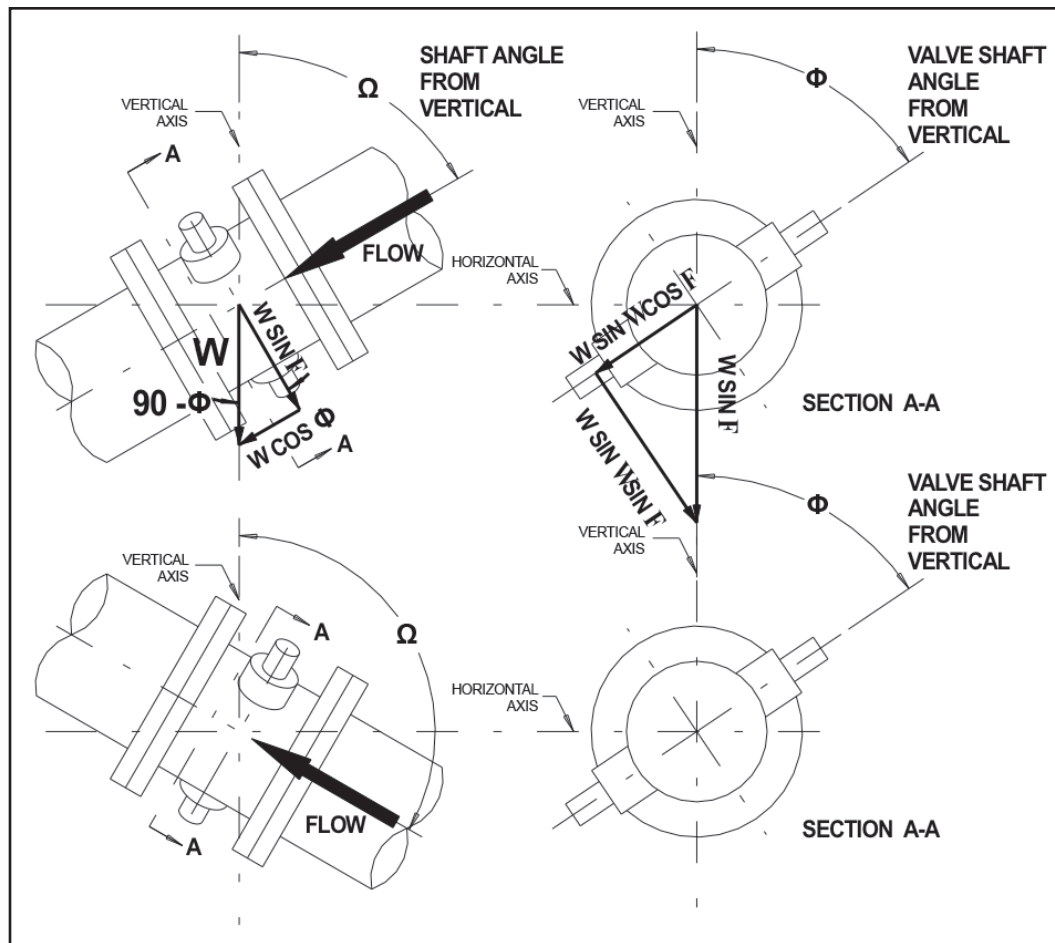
Bearing torque caused by closure member and shaft(s) weight orientation angles
